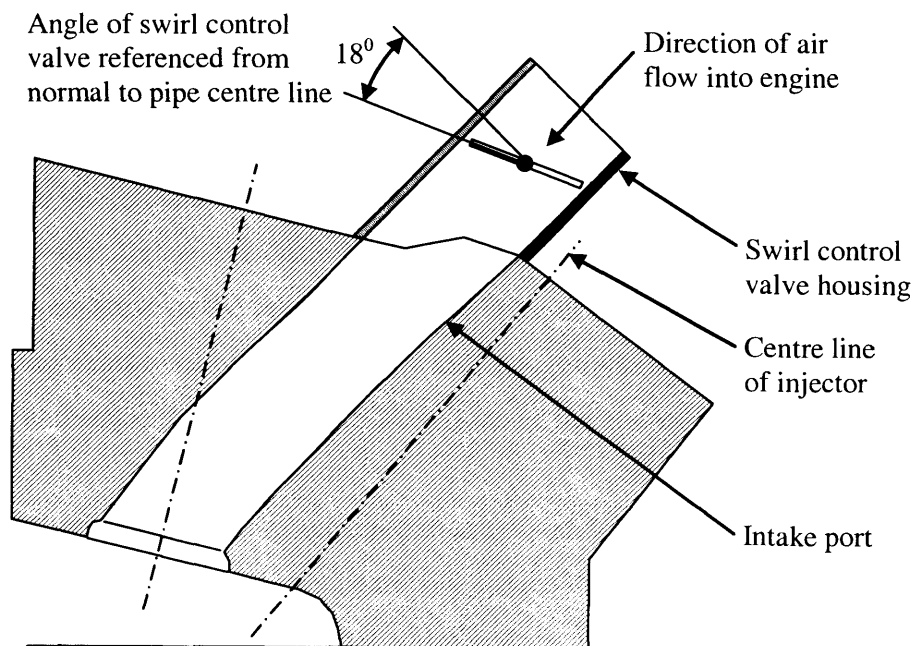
Section through intake port illustrating orientation of swirl control valve
